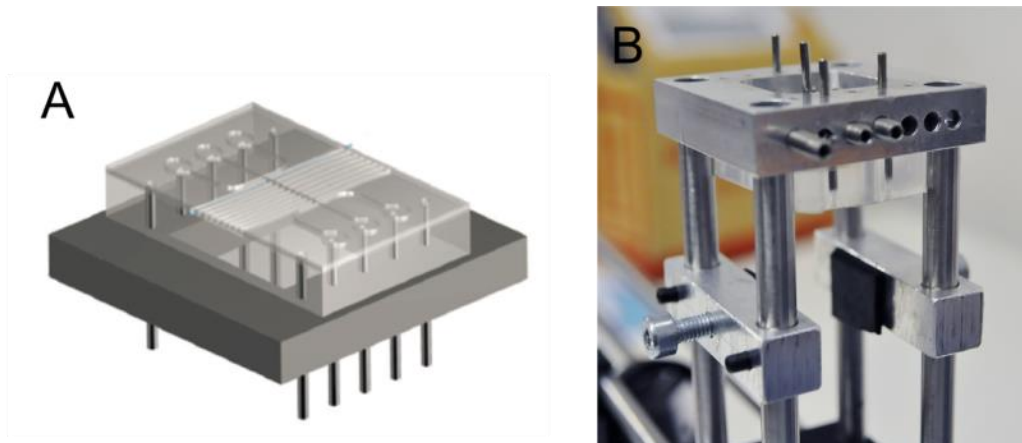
The chip chuck to mount the PDMS chip on rods, (A) 3D concept drawing [26], (B) application in the system.
